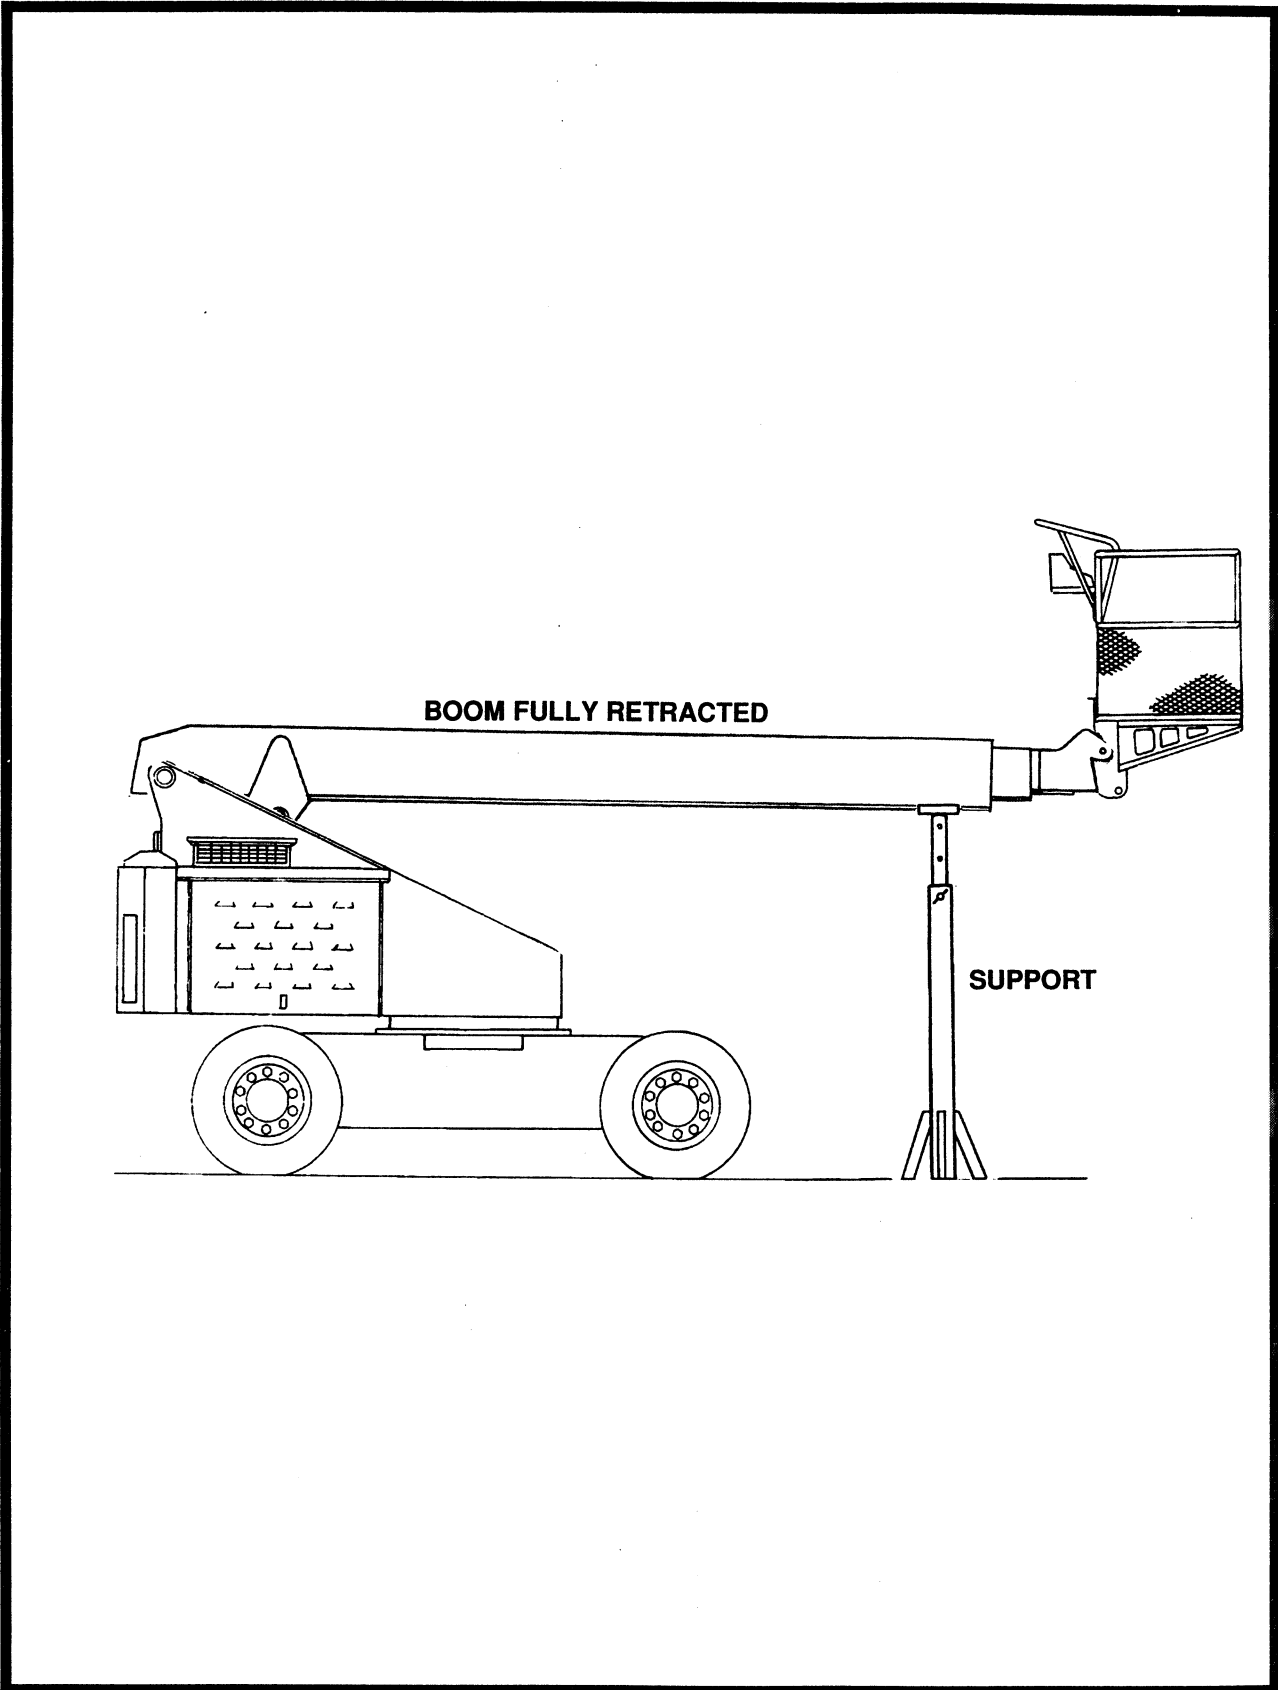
Boom Positioning and Support, Cylinder Repair.
